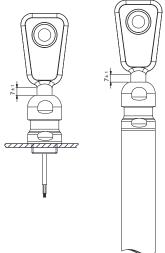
Mounting of pms sensor with sensor screw connection BF-pms/A1 mounted to machine part or to stainless steel tube D26.8 with internal thread M20x1.5
